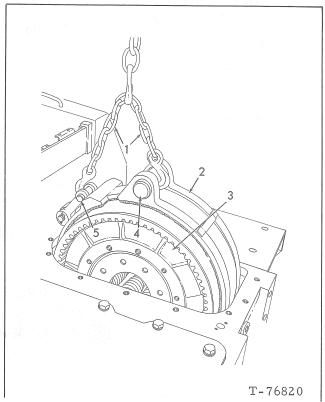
REMOVING STEERING CLUTCH AND BRAKE
